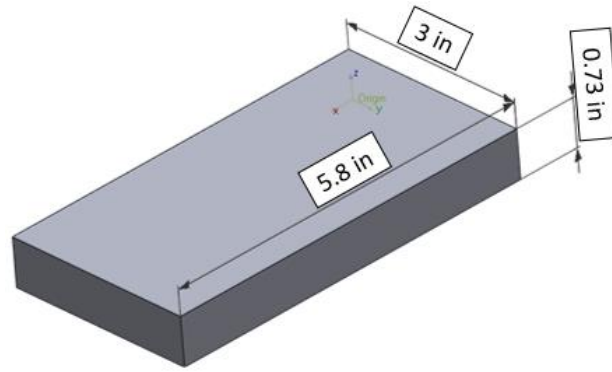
CAD Generated Perfect Shape for Face Milling Rough Pass
